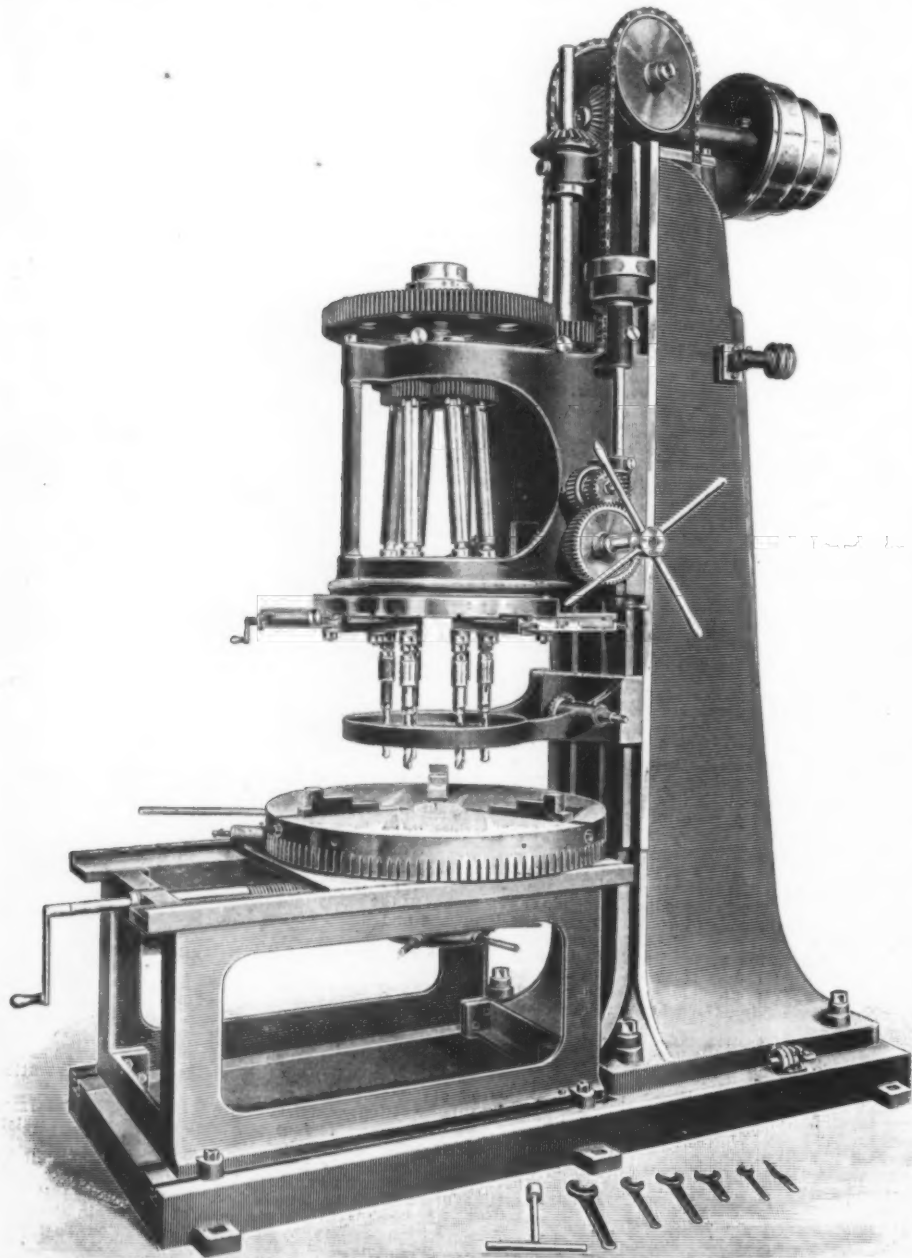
PHOENIX DRILLING MACHINE MADE BY HABERSANG & ZINZEN.
